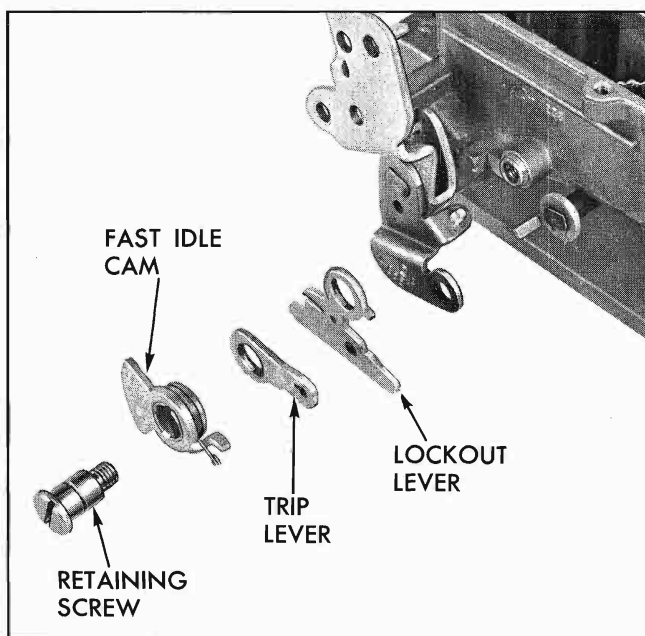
B-90 Lockout Lever and Fast Idle Cam
